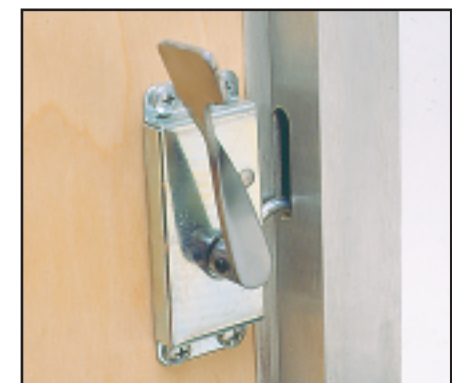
C Type 1R Latch with braces and 'U' Receiver for holding inside corners tight and at 90°. (See TDS 40)
